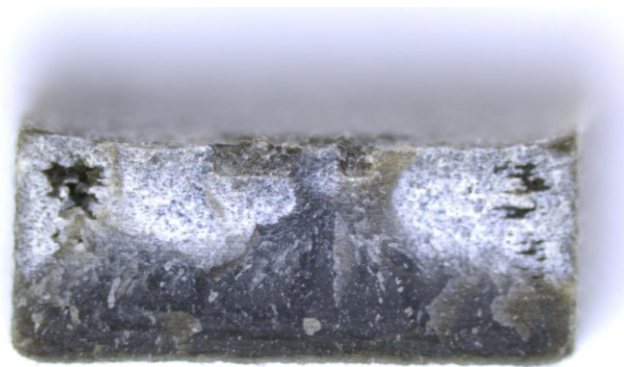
Breaking section of a 1/3 aged specimen, BXY-25
